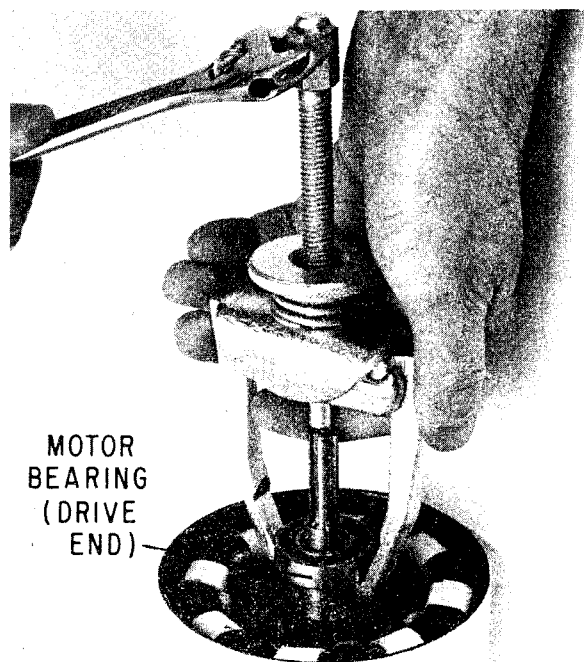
REMOVING MOTOR BEARING (DRIVE END)
